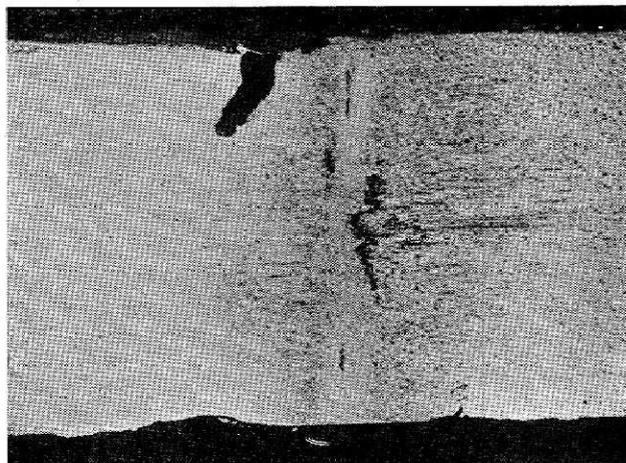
DEFECTS IN RESISTANCE BUTT WELDED MONEL PICKLING CHAIN SHOWING PIT ($\times 6$)
